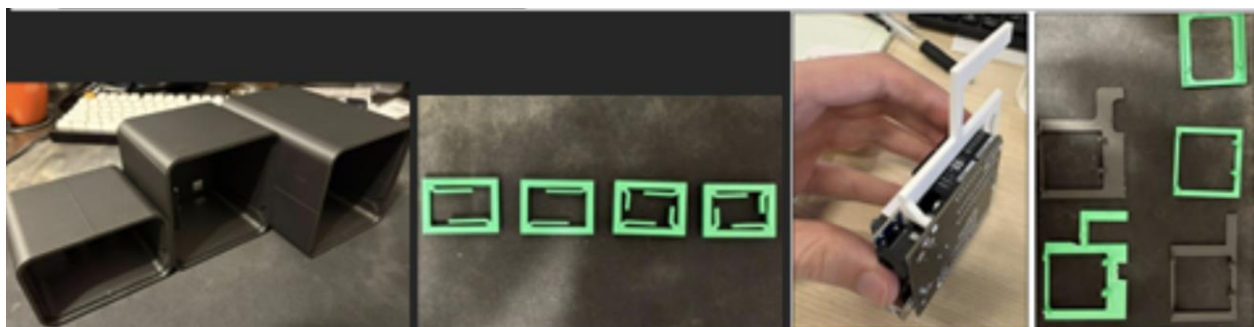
Biomedical device parts fabrication and assembly to Arduino UNO
